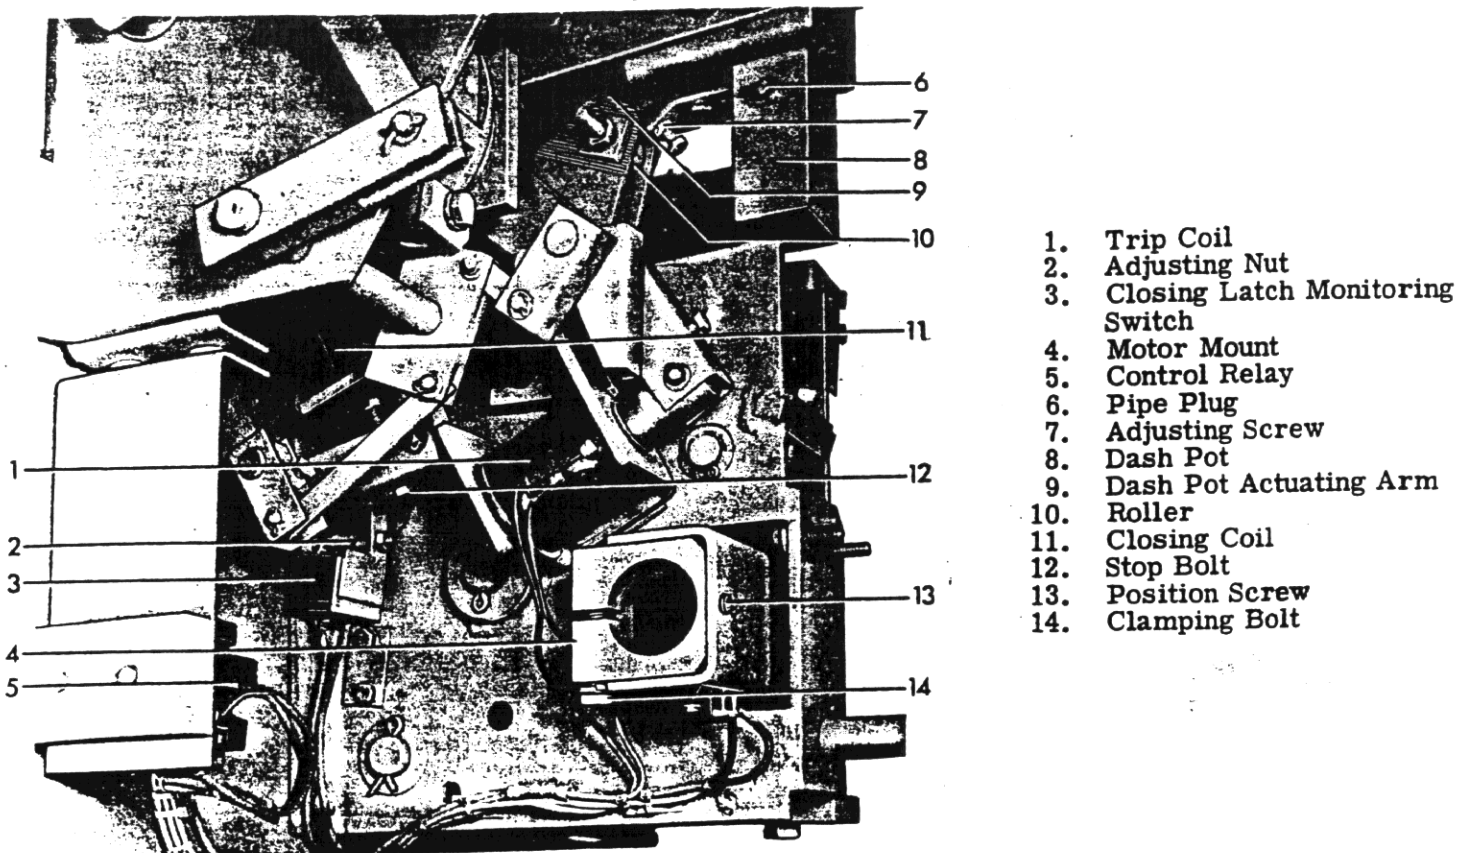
(8041562) Left Side ML-15E Operating Mechanism
